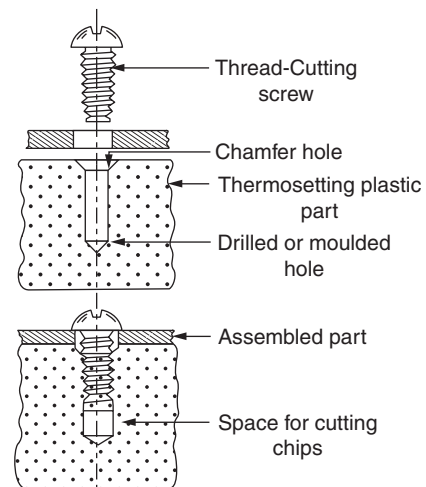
Six types of USA standard thread-cutting screws are recommended for use in thermosetting plastic materials.
